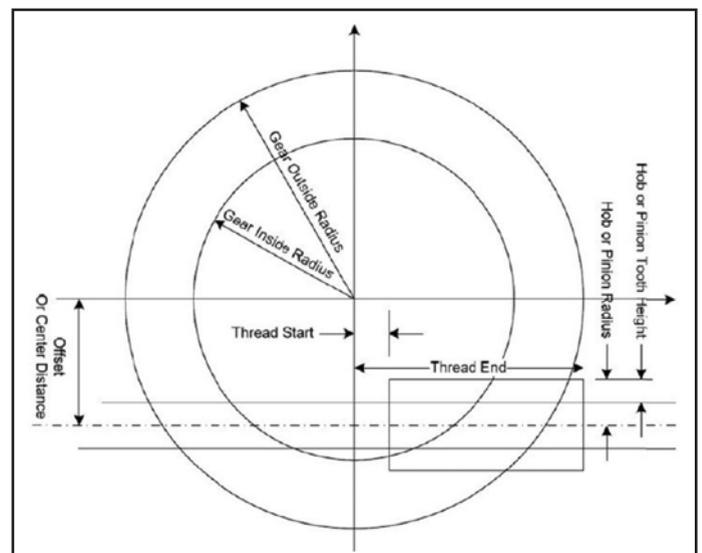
Spiroid gear/pinion assembly or gear/hob set-up.
